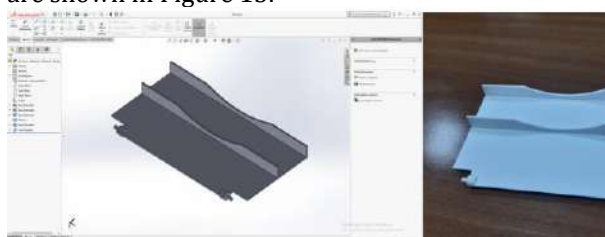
Drawing of the shutter on the pool and a prototype of the shutter made by 3D printing
